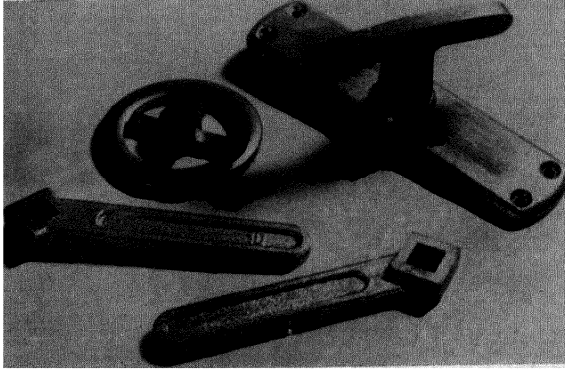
Valve wheel, valve wrenches, and window latch assembly produced in Austria from sintered steel (according to Kieffer, Benesovsky, and Bartels<sup>94</sup>).
